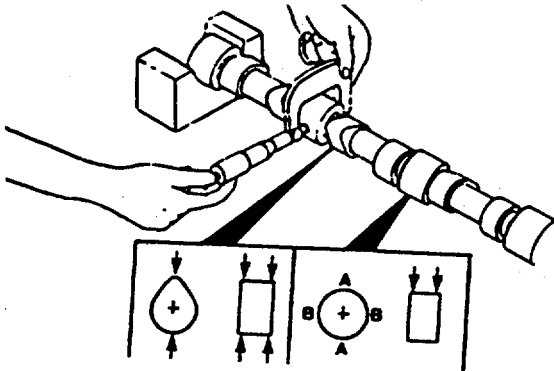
Measuring Valve and Lift Pump Lobes.
